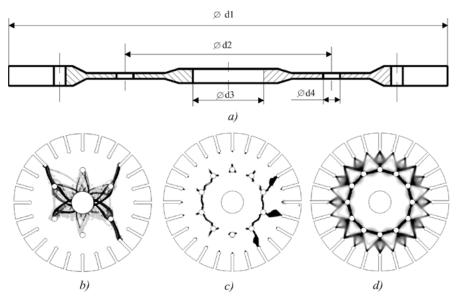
Overspeed test: a) – disc scheme; b) – fracture of disc with 6 holes; c) – fracture of disc with 10 holes; d) – fracture of disc with 12 holes
